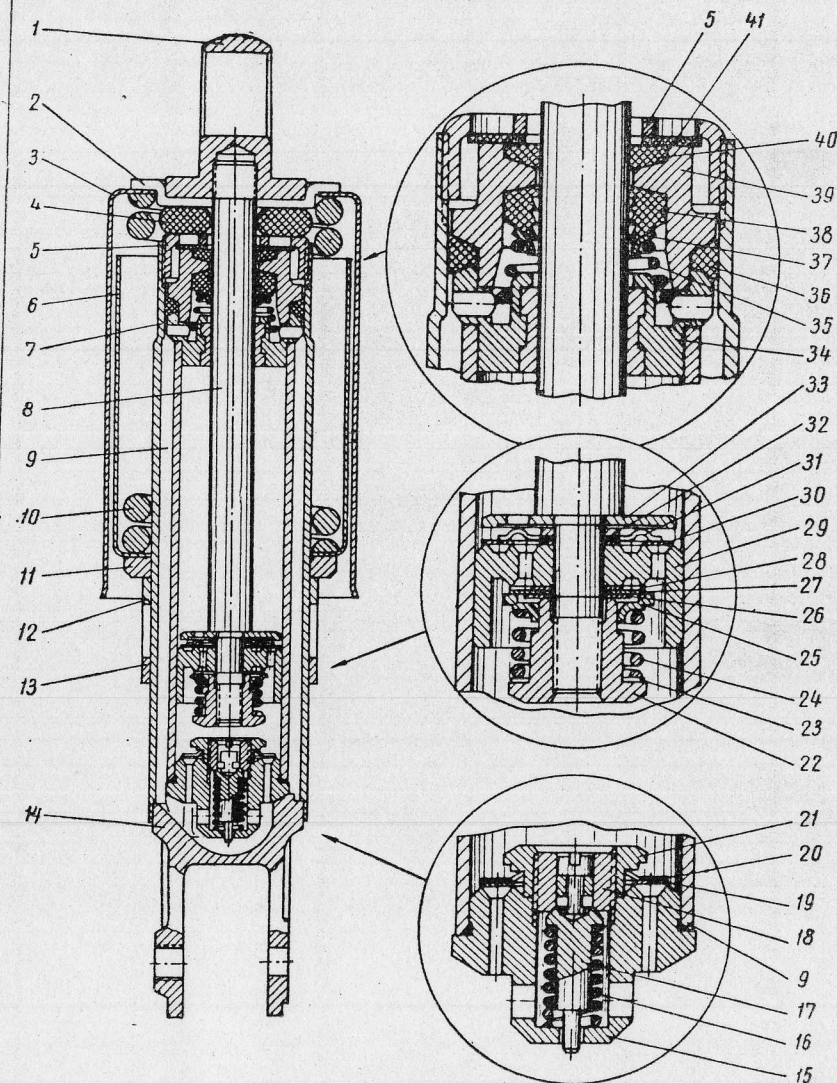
Spring-Loaded Hydraulic Shock Absorber:
